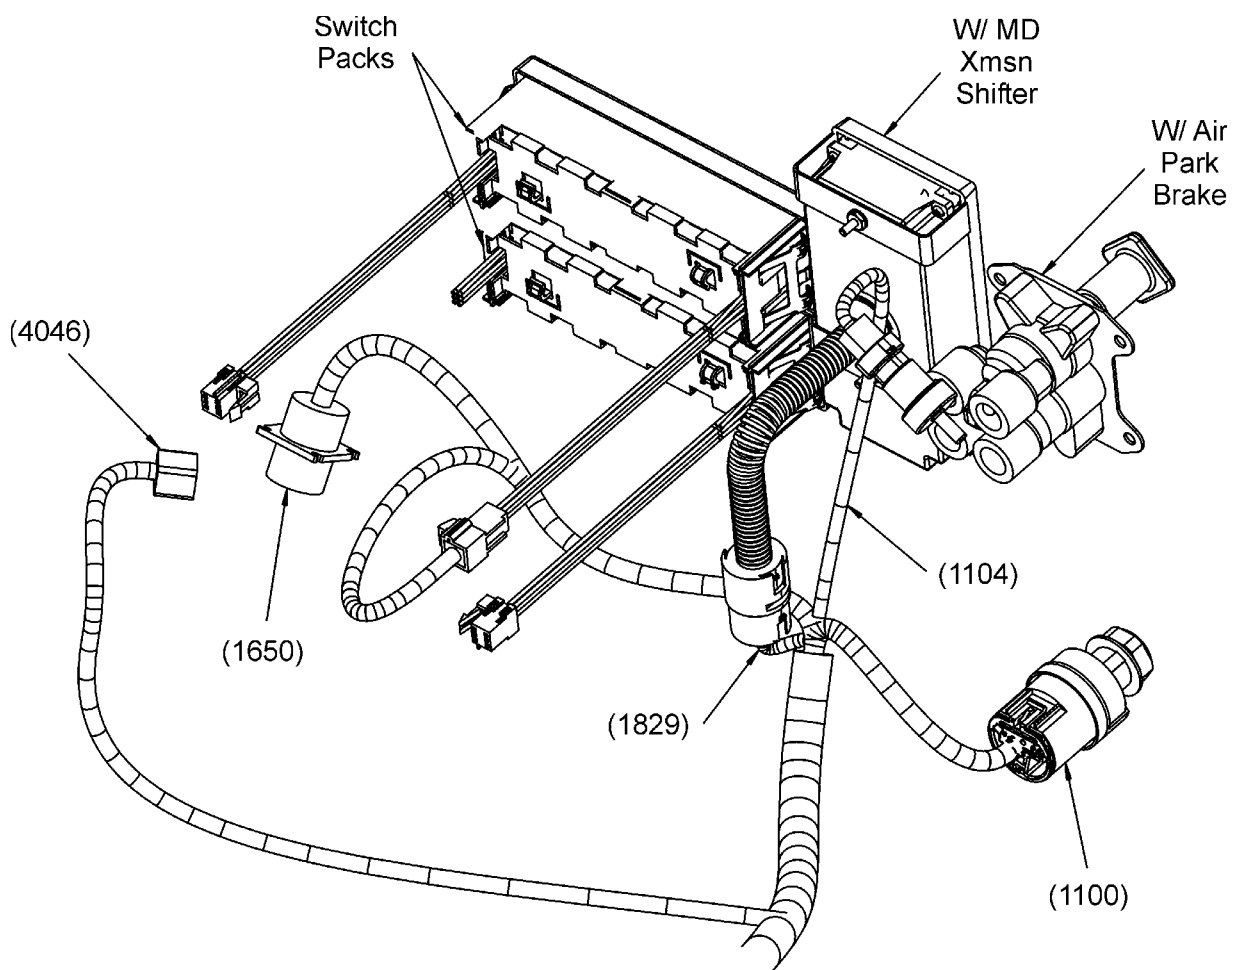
Air Park Brake Switch Location (Steering Column Support View)
